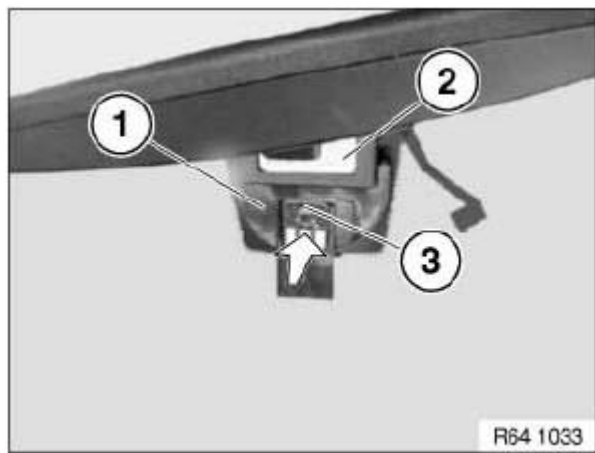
Identifying Rain Sensor, Fogging Sensor And Mounting Template
